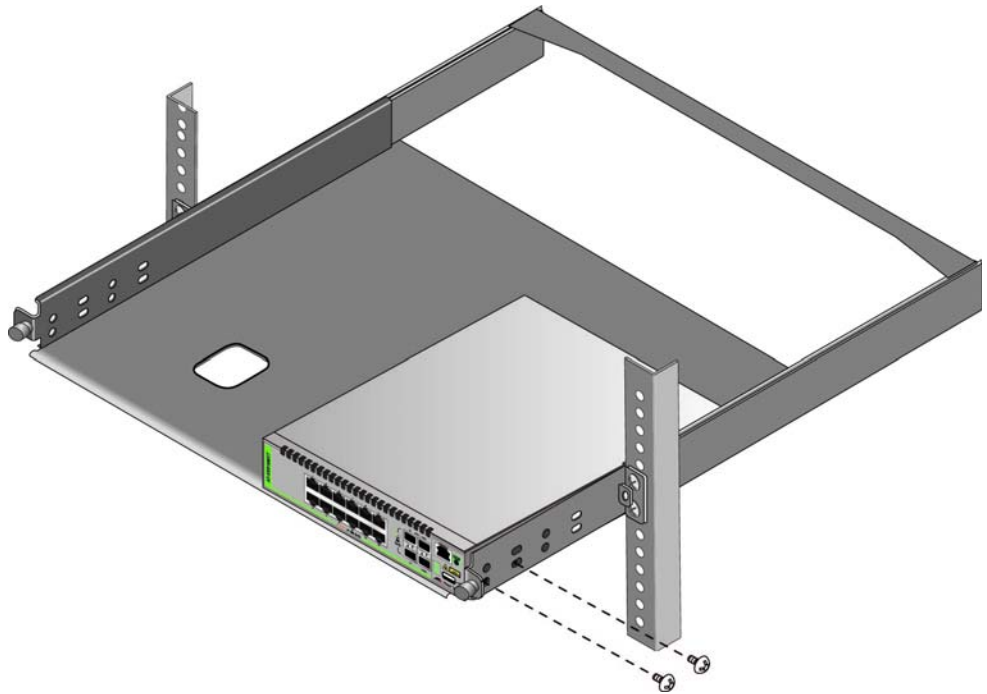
Securing the Switch to the AT-RKMT-J15 Bracket
